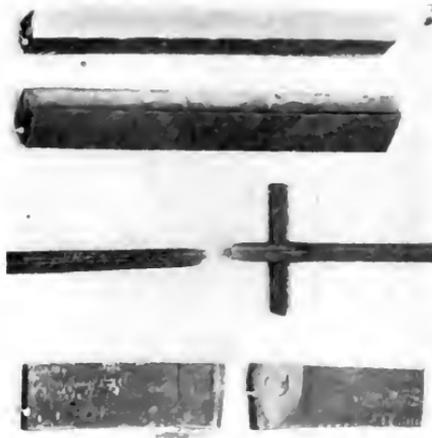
Samples of Welds made in the Machine Shown in Fig. 1
